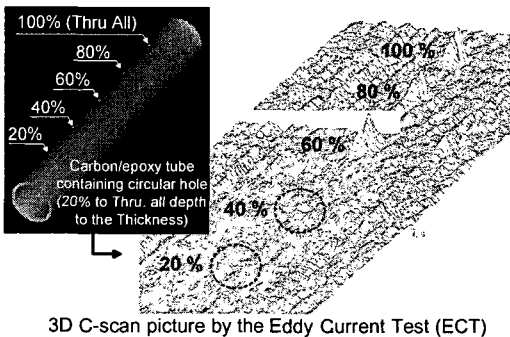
Three dimensional picture by the ECT in CFRP tube containing circular hole defects (20% to 100% depth to the thickness)
